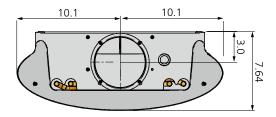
Dimensions ADRIATIC Ellips, end view air connection.
